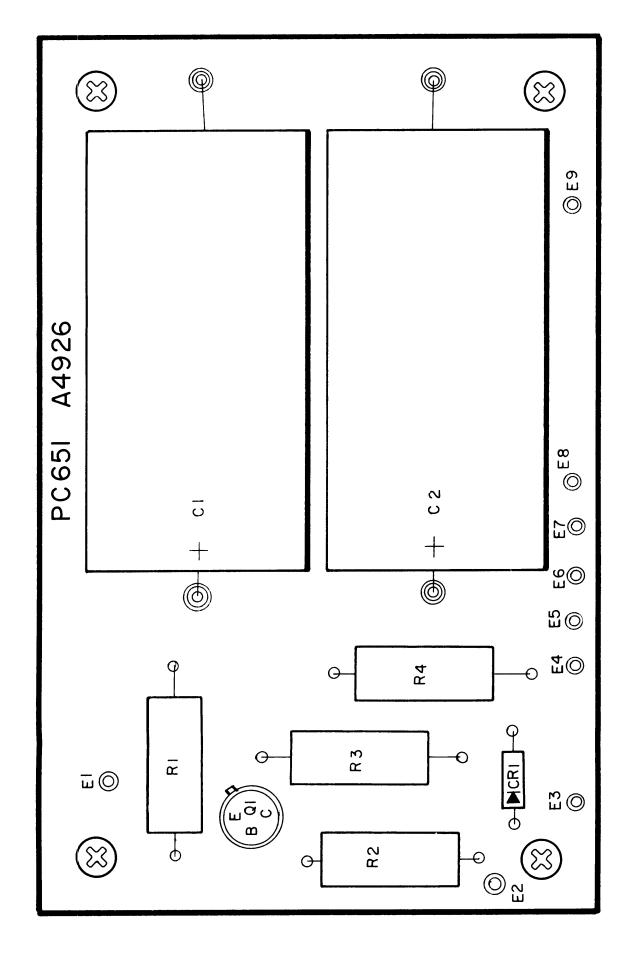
Power Supply Assembly Z105, Component Location and Parts List
